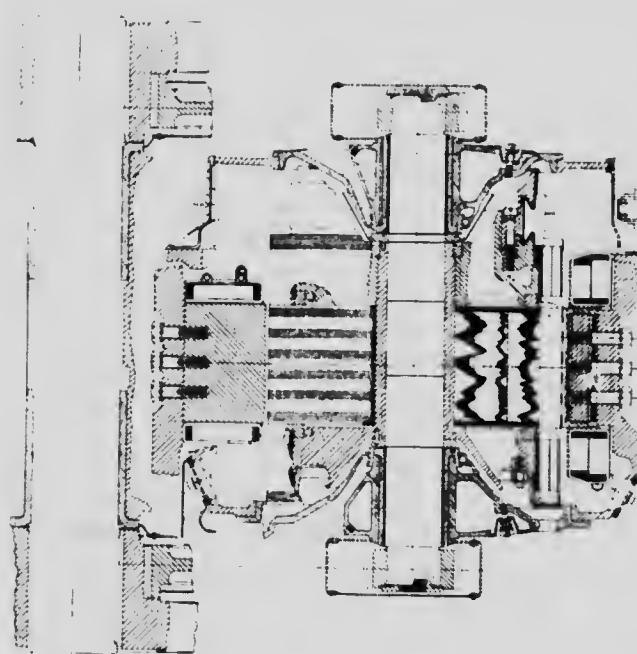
,777—1. Cross-Section of Double-gear Railway Motor.
